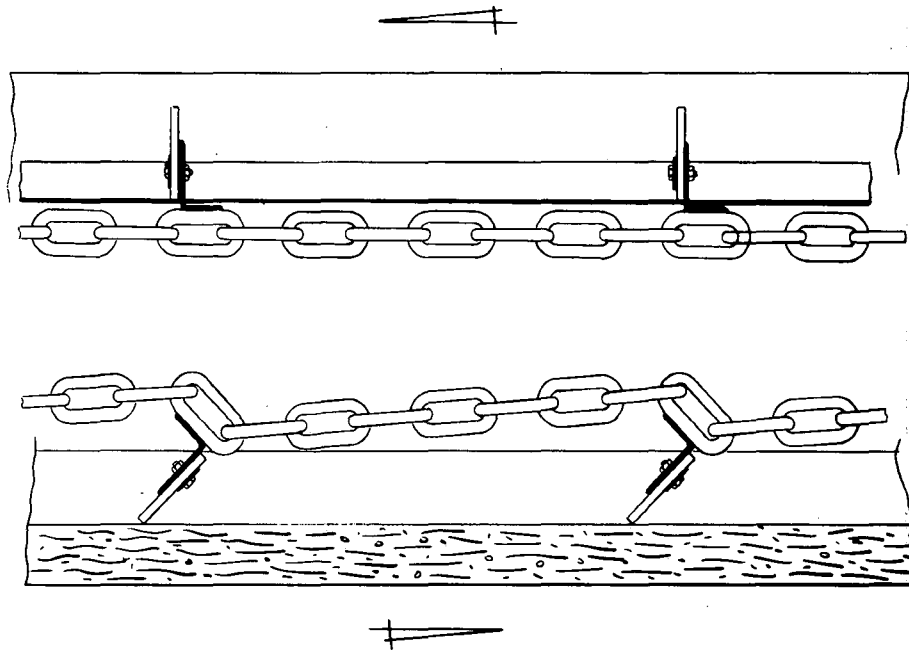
Sectional side elevation of mud conveyor showing slats cranking and skidding over the mud due to slack chain
